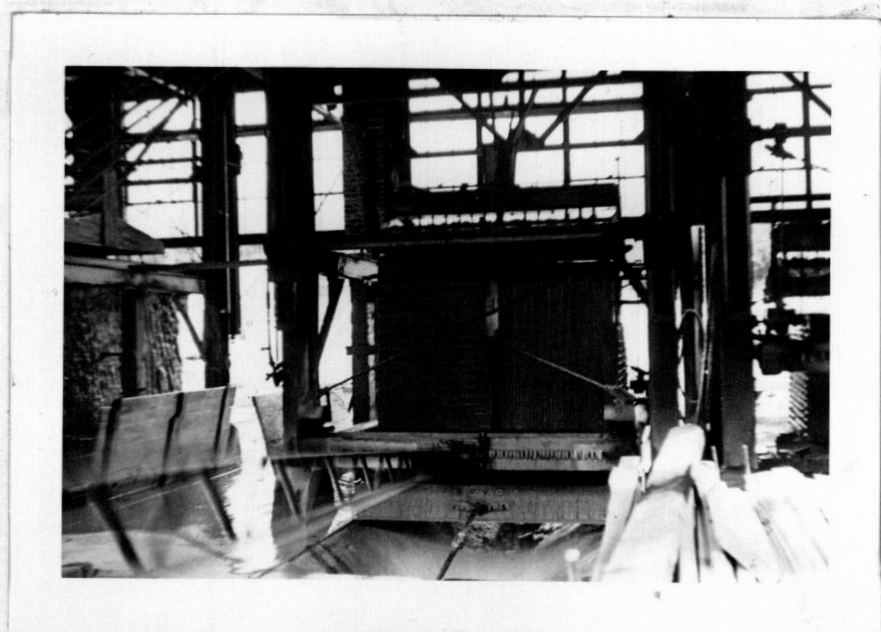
This gang is nearing the bottom of two large blocks of marble.
